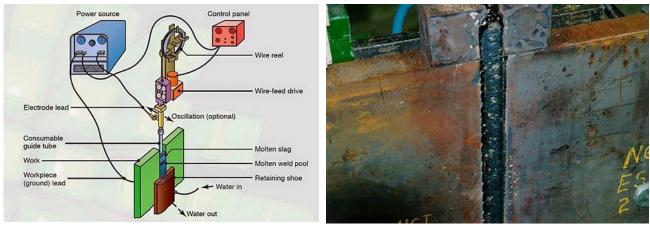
Schematic of the Electroslag welding process [29]
